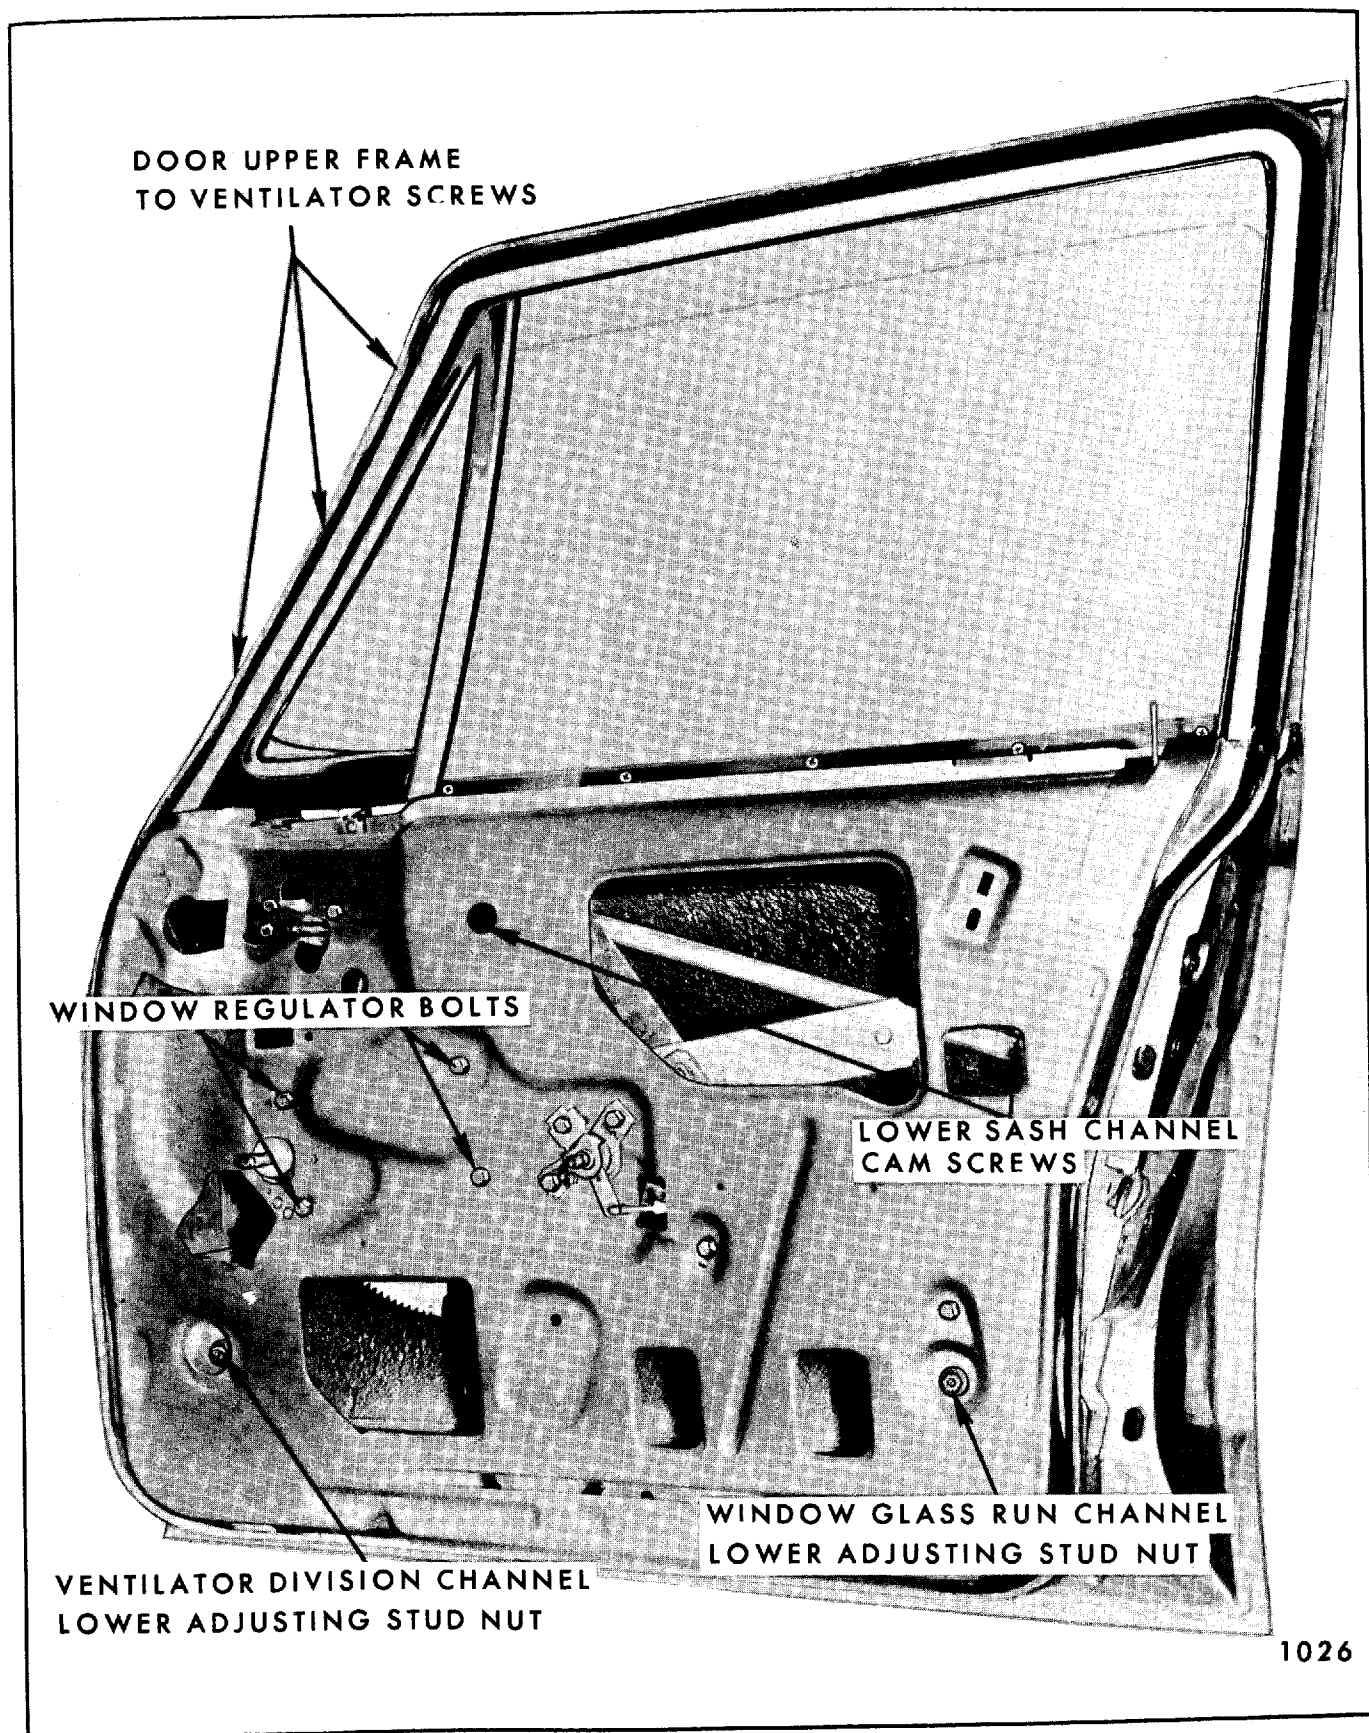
Door Ventilator and Regulator Attachment - - "B & C" Closed Styles
